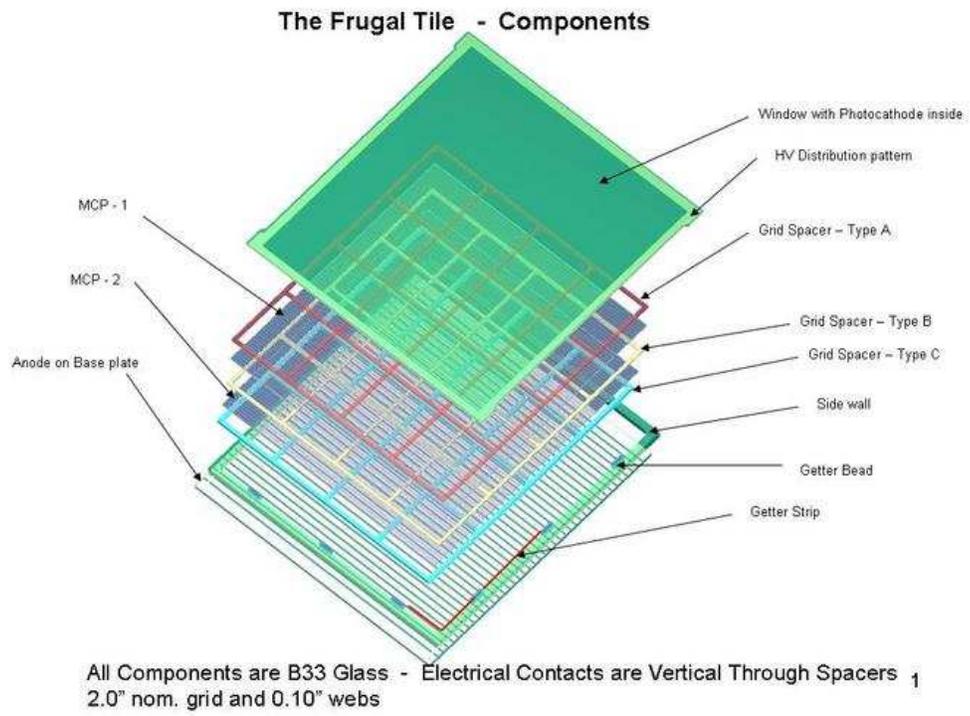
Exploded view of the all-glass single tile photodetector.
